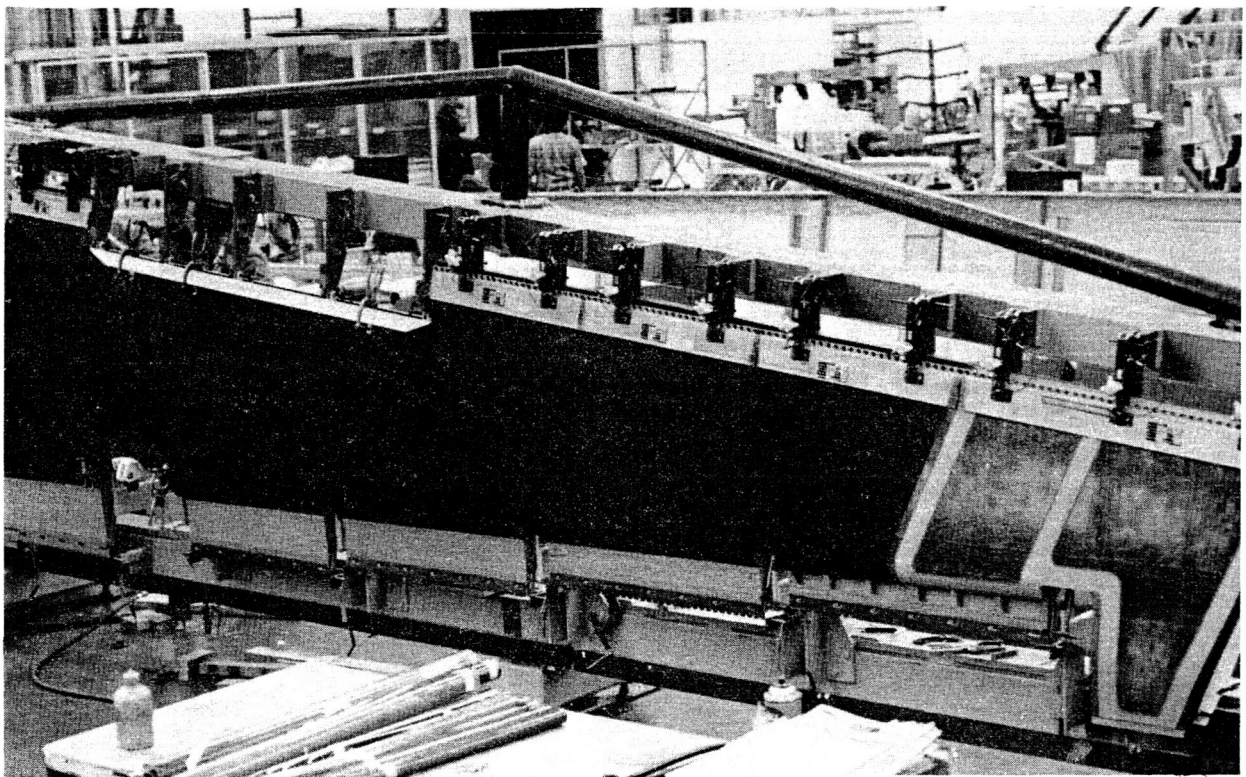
Elevator Major Jig Position Showing Upper Skin Panel in Position During Sealant Cure
